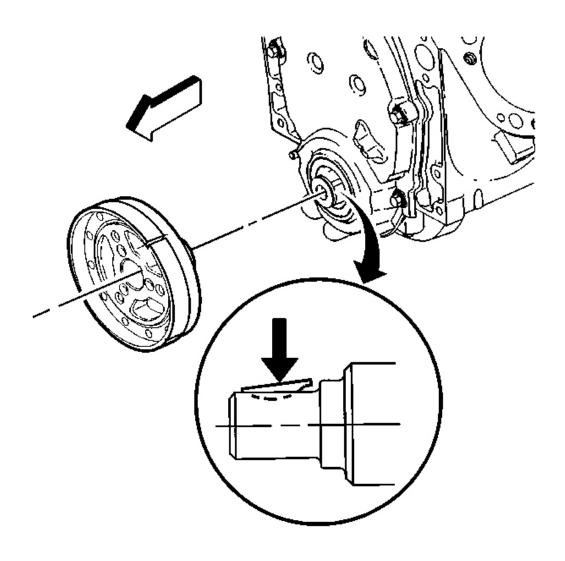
Installing Crankshaft Balancer Courtesy of GENERAL MOTORS CORP.
